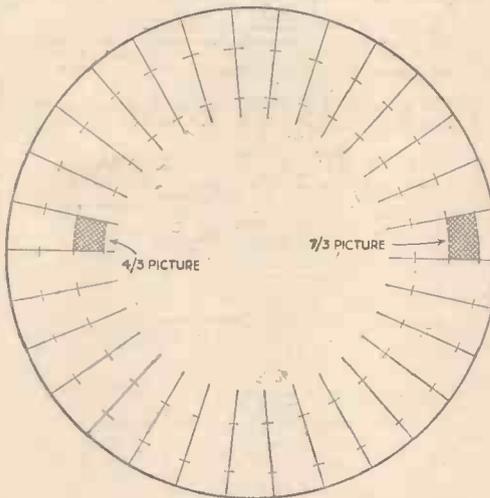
The disc marked out with an outer clockwise spiral of holes and an inner with a clockwise spiral of holes.
